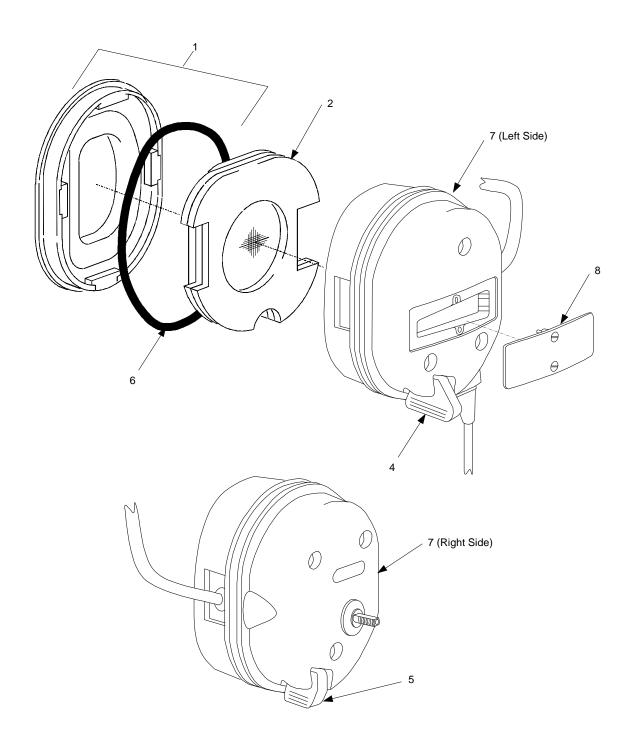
Headset, Electrical Assembly (Sheet 1 of 2)
